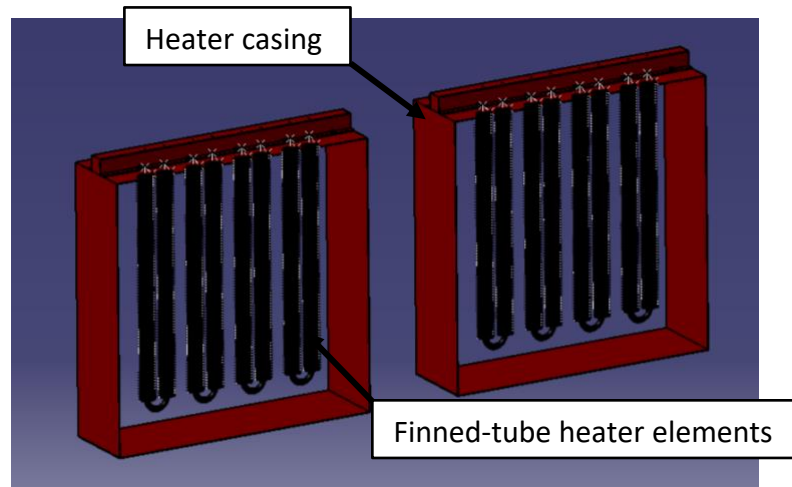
Design of the finned-tube heater elements inside the heater casing
